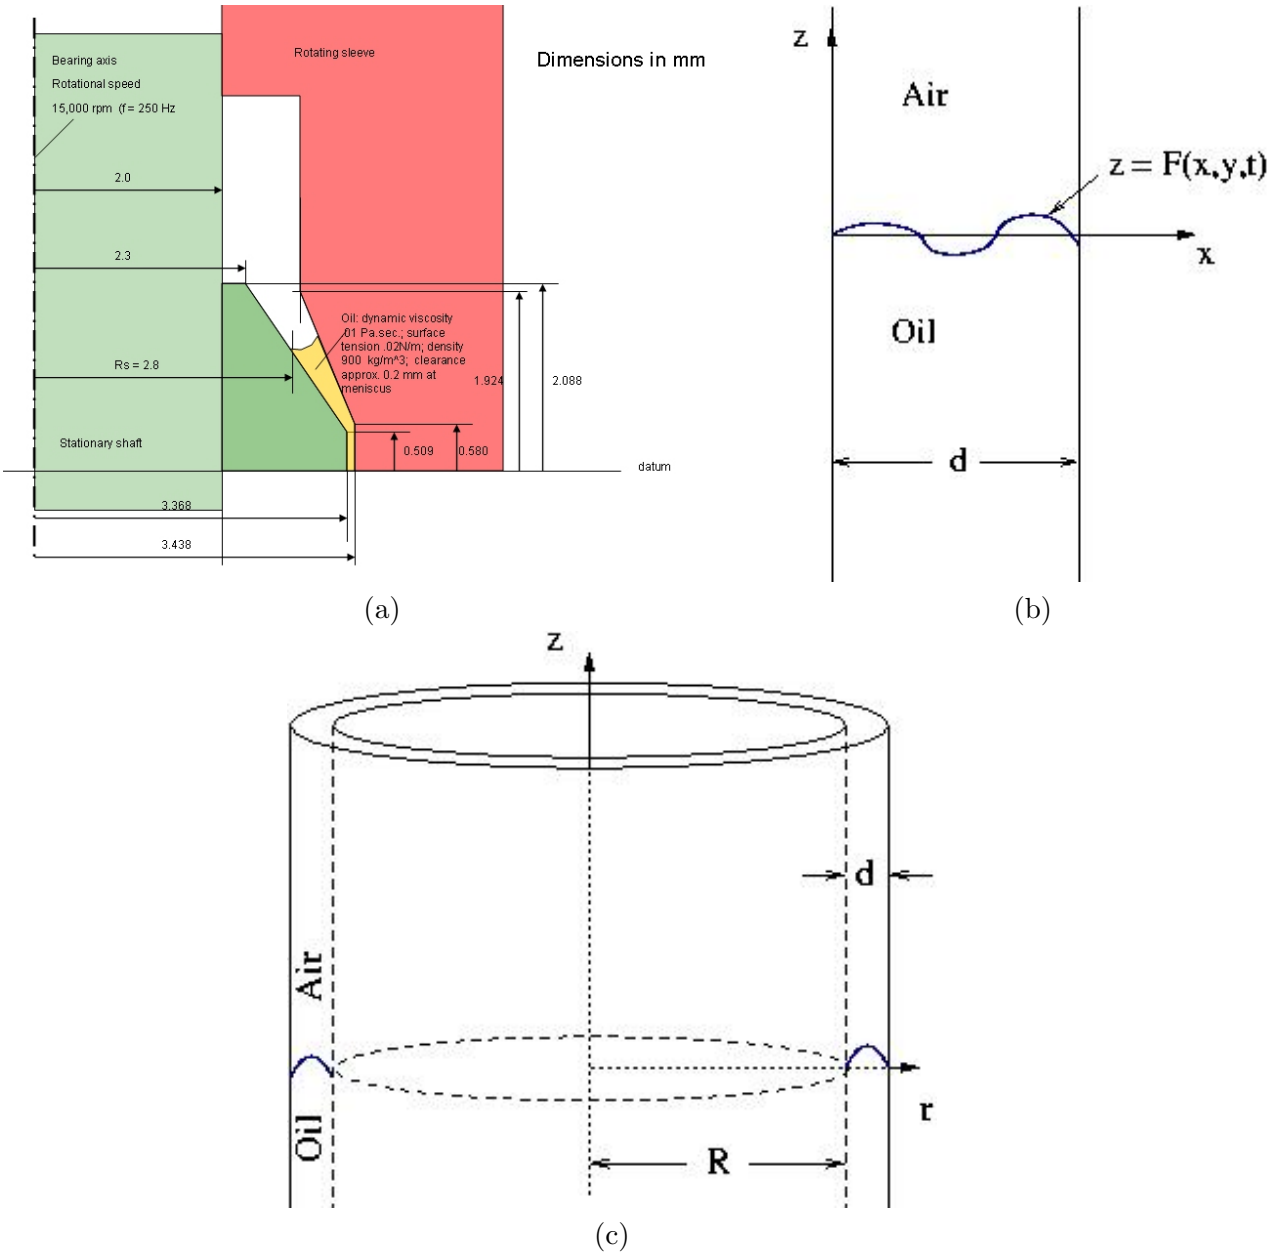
(a) Capillary buffer region about the fluid bearing in a hard disk drive. (b) Slot geometry. (c) Cylindrical geometry.
